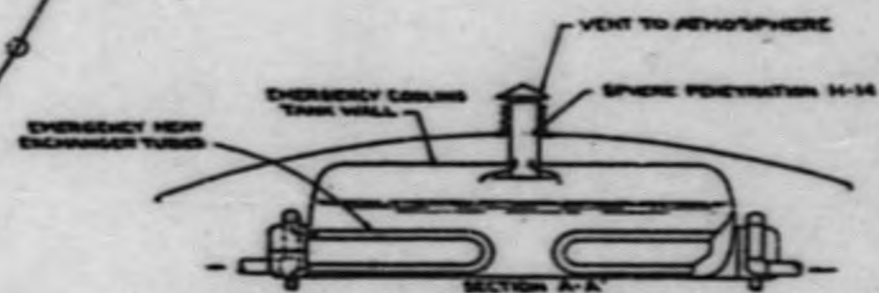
PLANT EQUIPMENT ARRANGEMENT
